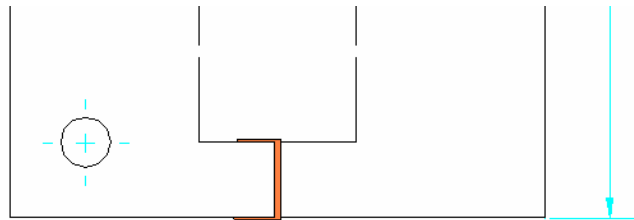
The blockage of the unused bottom thermocouple hole in the dies
